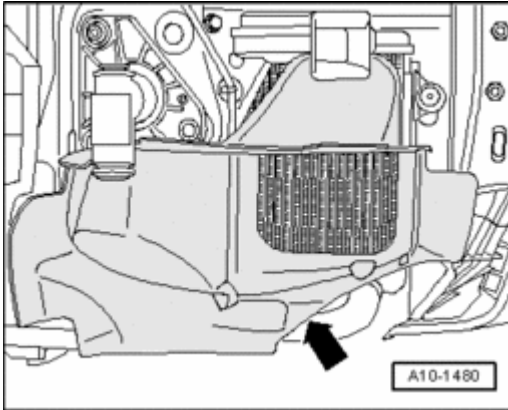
Removing Air Duct In Front Of Left Auxiliary Cooler
